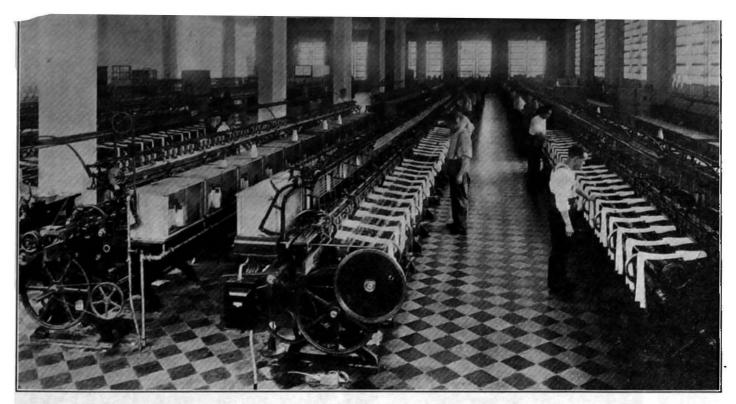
Argentine mill with modern machinery for making full-fashioned hosiery
